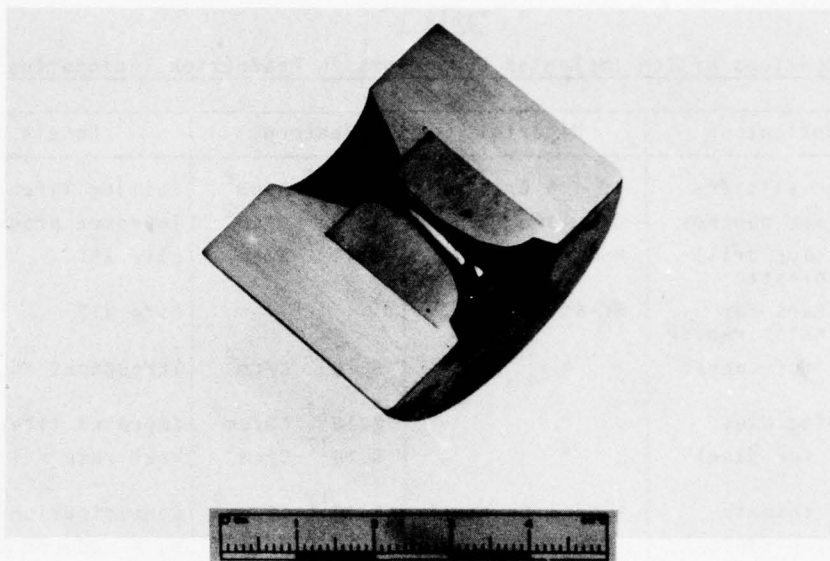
Photograph of a sectioned wire-drawing die with a tungsten carbide insert which can be ion implanted for improved performance
